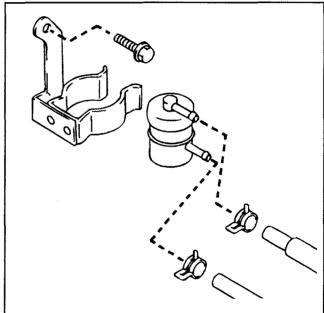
Low-pressure fuel filter - Fuel Injected Motors
